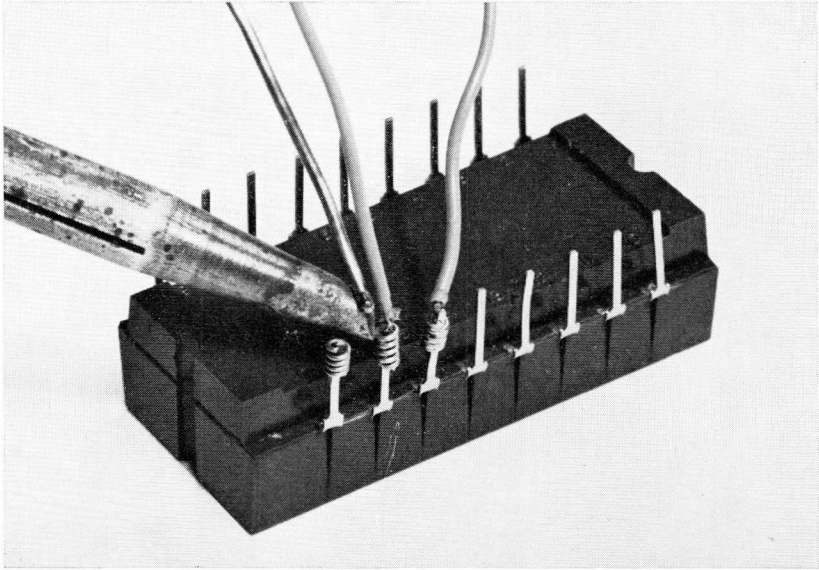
A method of supporting the joint for soldering, using a small spiral of wire. At left, the spiral is placed on a pin. Centre, the connecting wire end is placed inside the spiral. Right, solder is applied to fill the spiral.
